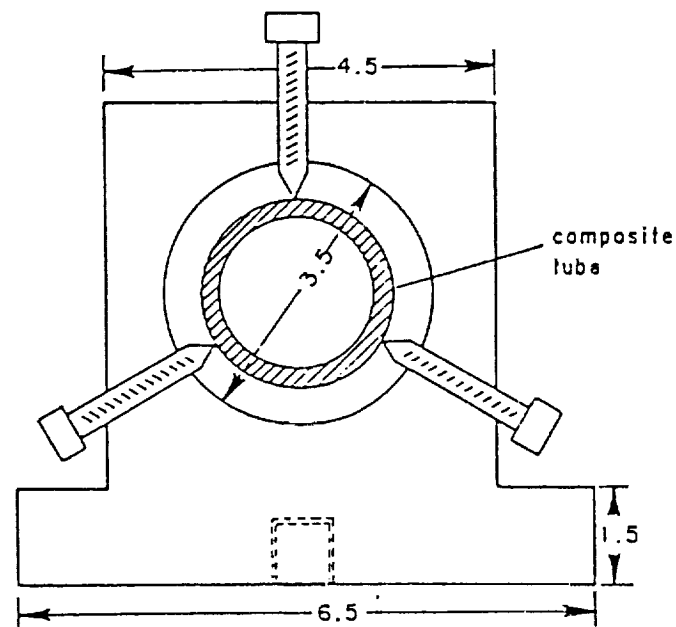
Knife Edge Support for Mounting the Tube Specimen
